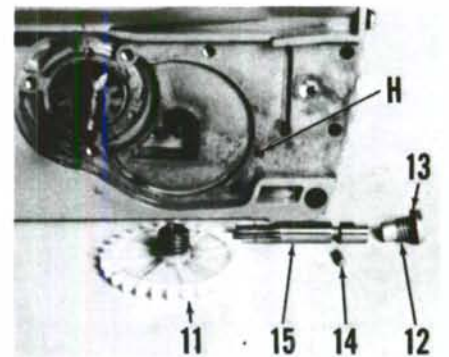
View of oil pump components. Pin (14) is located in hole (H). Refer to Fig. H15 for parts identification.
